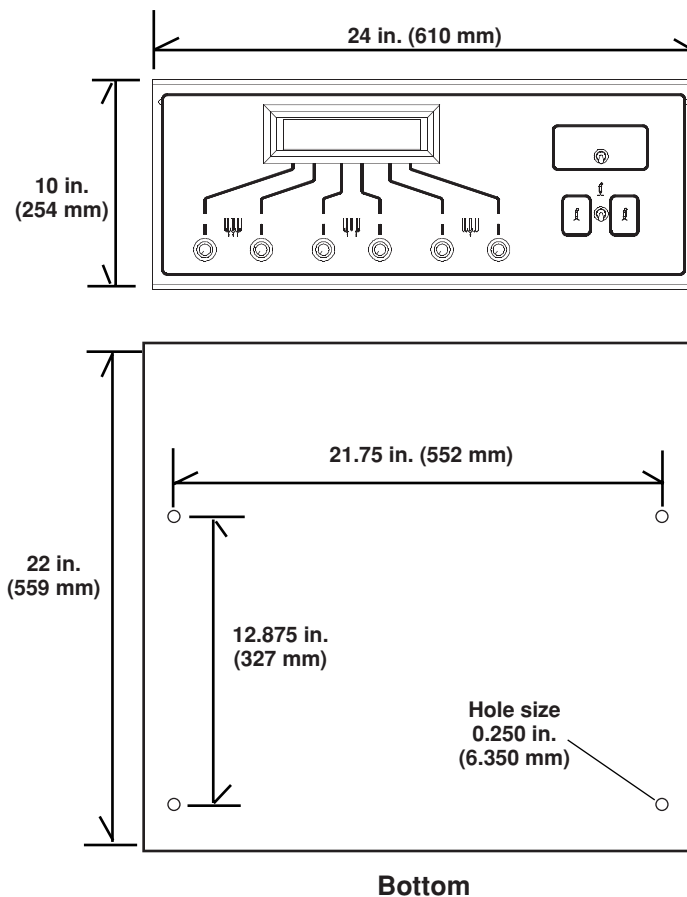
Automatic Gas Console Removal Procedure and Mounting Dimensions
